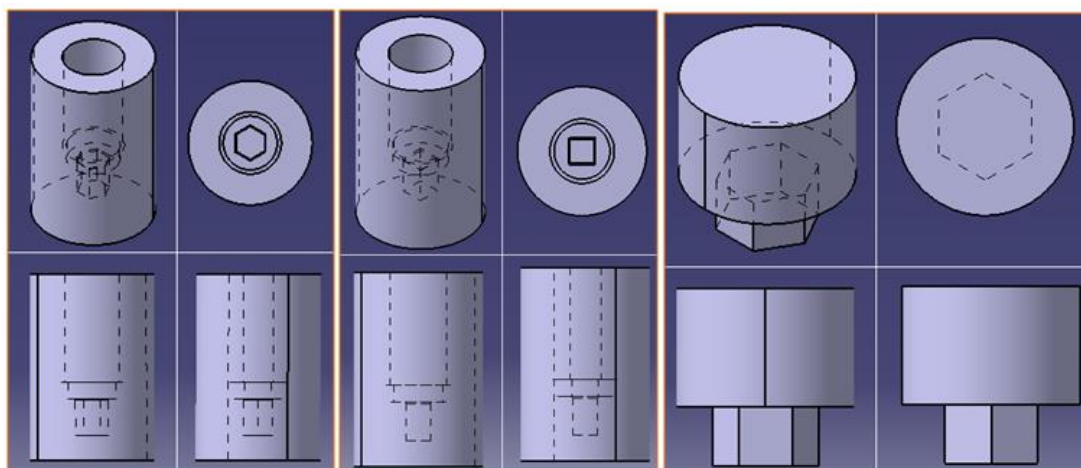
Sectional views with dimension of hexagon-hexagon and square-square socket adapter
